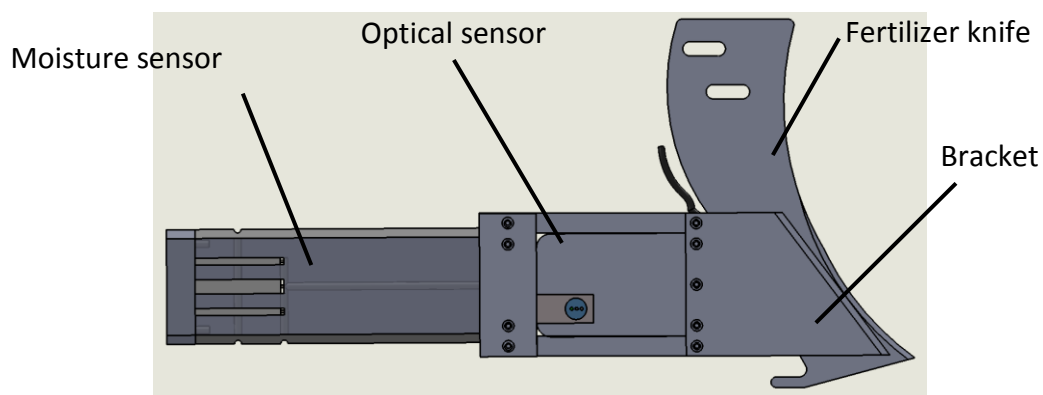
Bracket welded to fertilizer knife with the optical sensor and moisture sensor bolted to the bracket.
